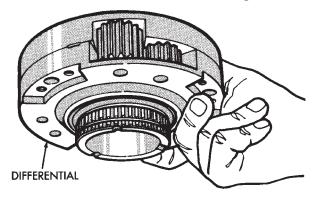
Installing Mainshaft Bearing Rollers and Spacers
